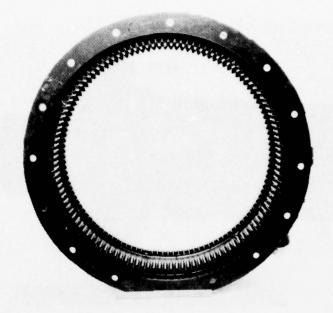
Ring gear case after 25-minute loss-of-lube test of optimized transmission configuration number 1.
